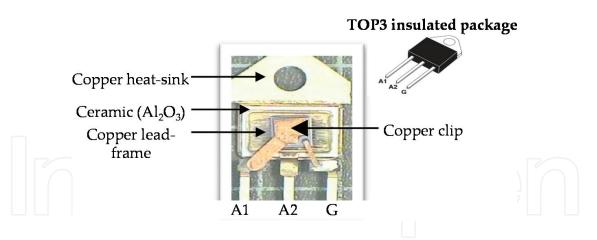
25 A, 1200-V Triac assembled in a TOP3 insulated package using copper clip bonding.
